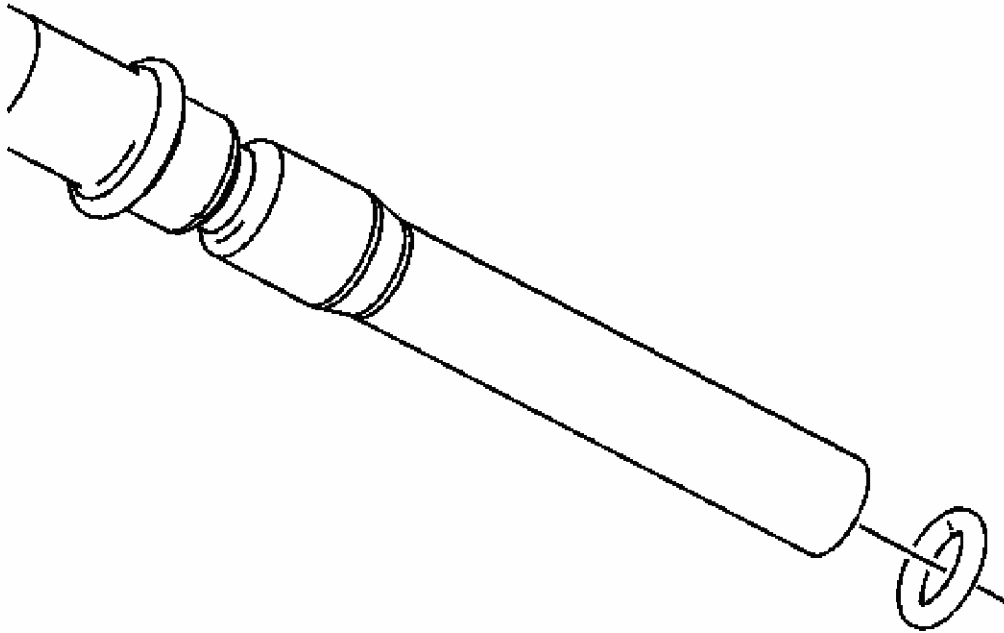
View Of Oil Level Indicator Tube O-Ring
